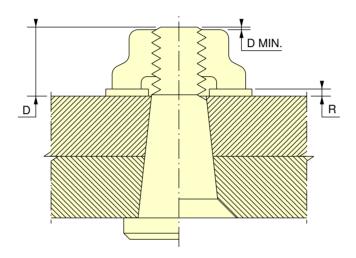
Figure A-FCBAA - Sheet 07 RH Side, Replacement of the Lower Panel Fasteners
